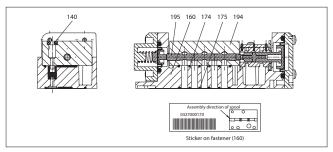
Spool valve assembly, ND9100 and ND7100 ND9200, ND7200, ND9300
